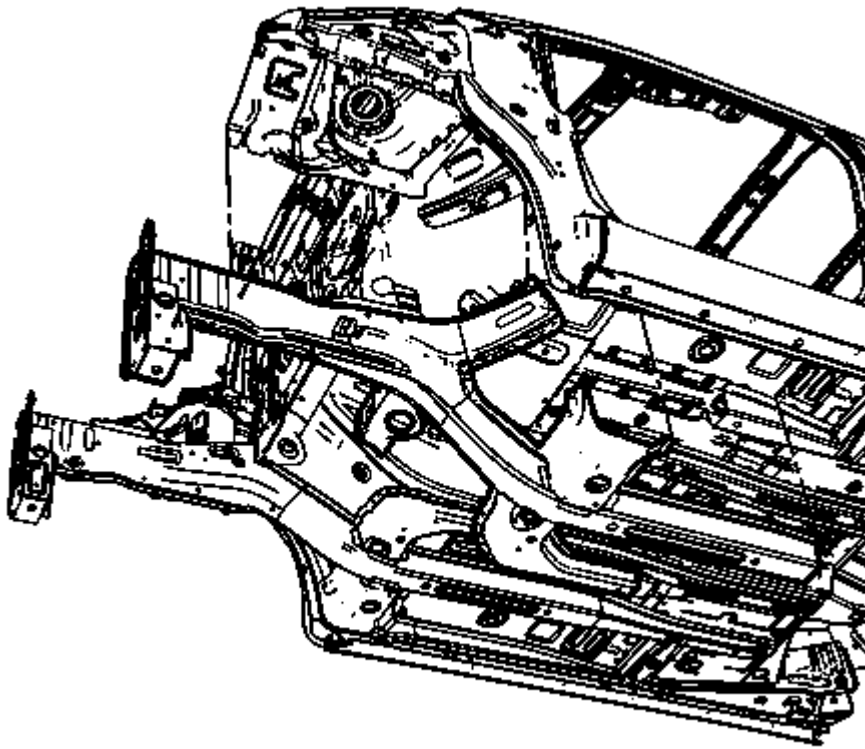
Front Compartment Side Rail Wheelhouse Panel
